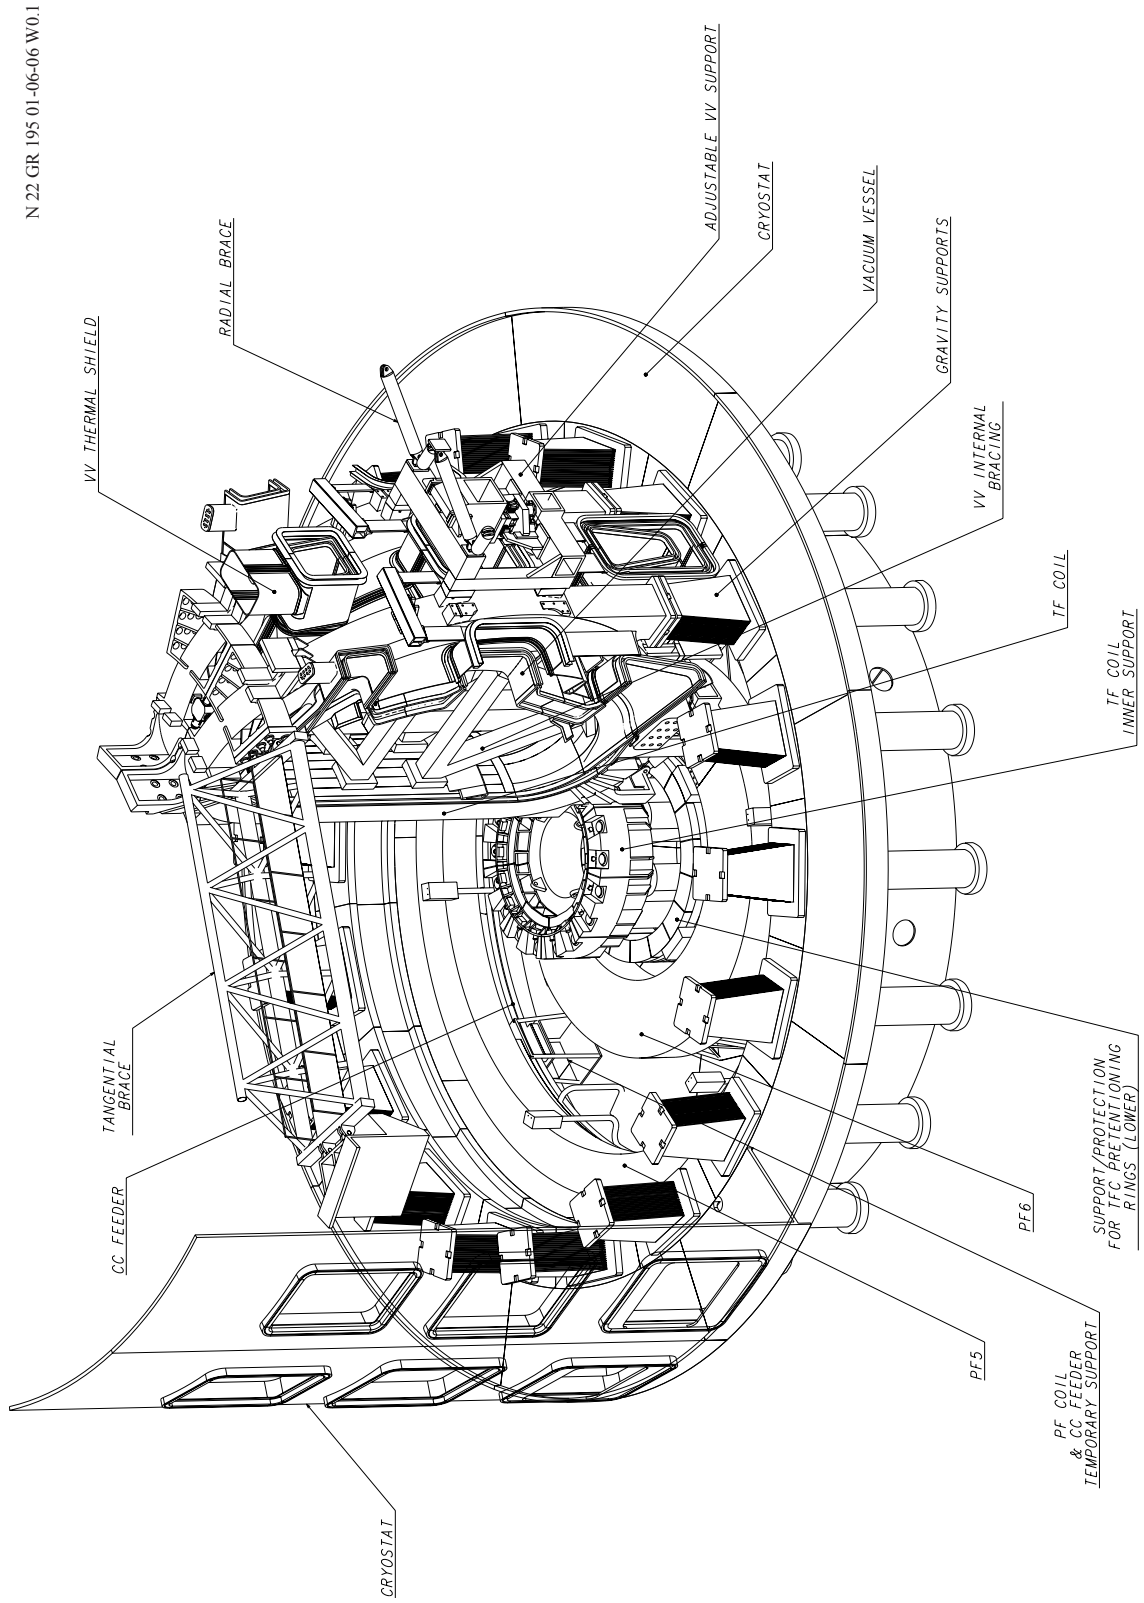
Layout of Assembly Support and Bracing Tools (2.2.B.04)
